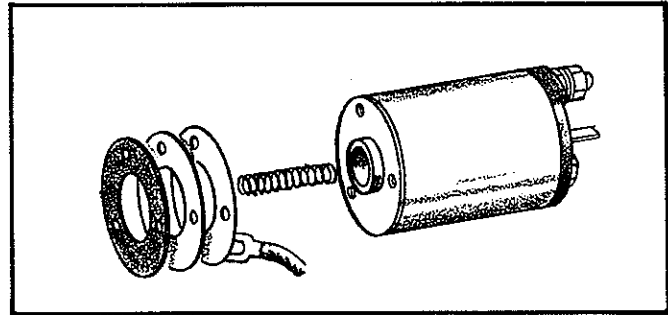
ADJUSTING PINION CLEARANCE
